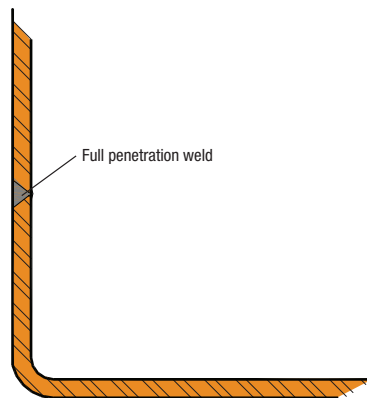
The preferred corner joint for light-gauge plate ranging from 10GA to 1/4-in. nominal thickness. Forming the corners and providing one full penetration weld helps to strengthen the corner and minimize plate distortions during welding
